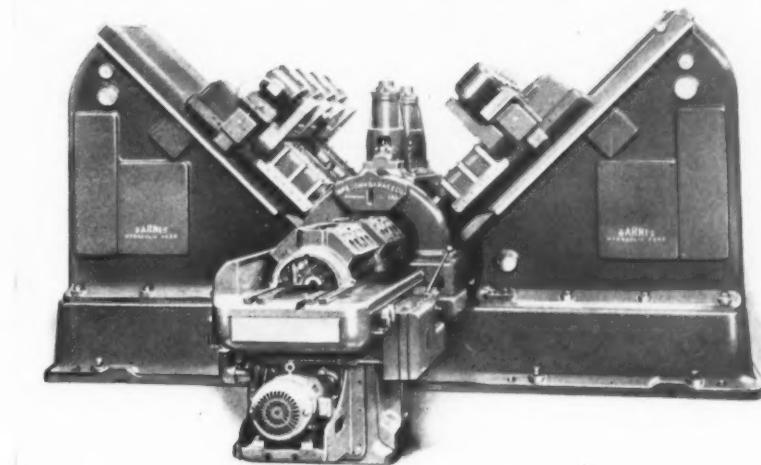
Barnes Multiple-head Machine which Simultaneously Finishes All Bores in V-eight Cylinder Blocks
